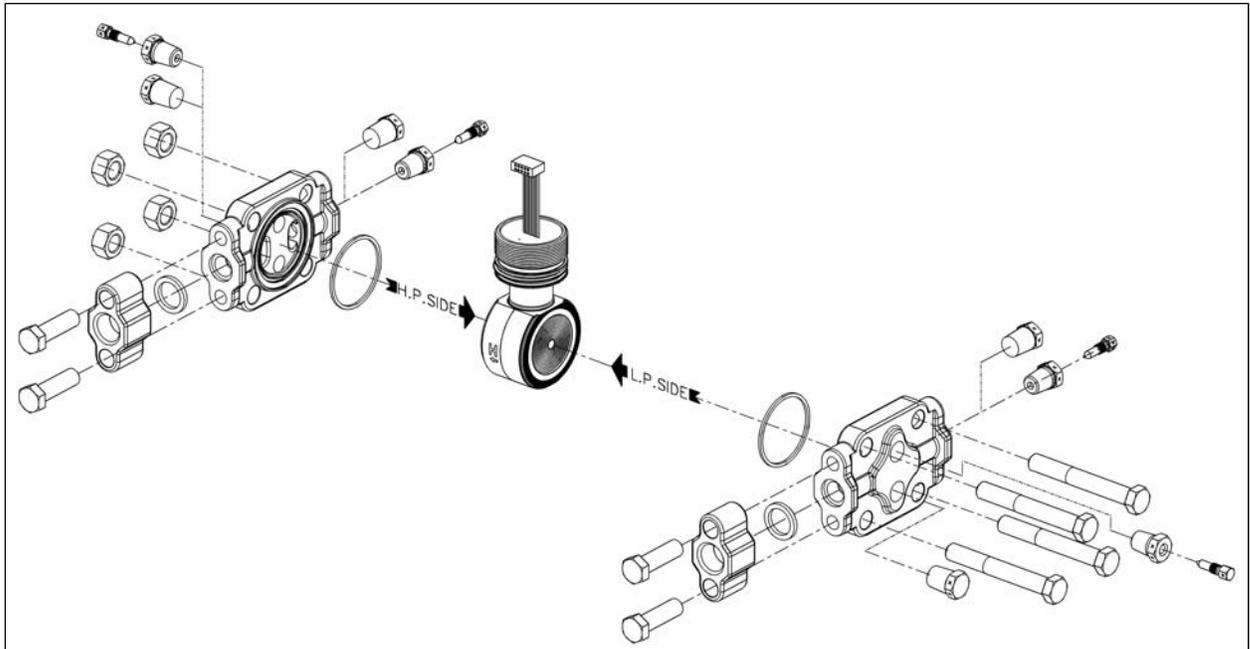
STG730, 740, 770, and STA722, 740 Transmitter Body (Ref.)
